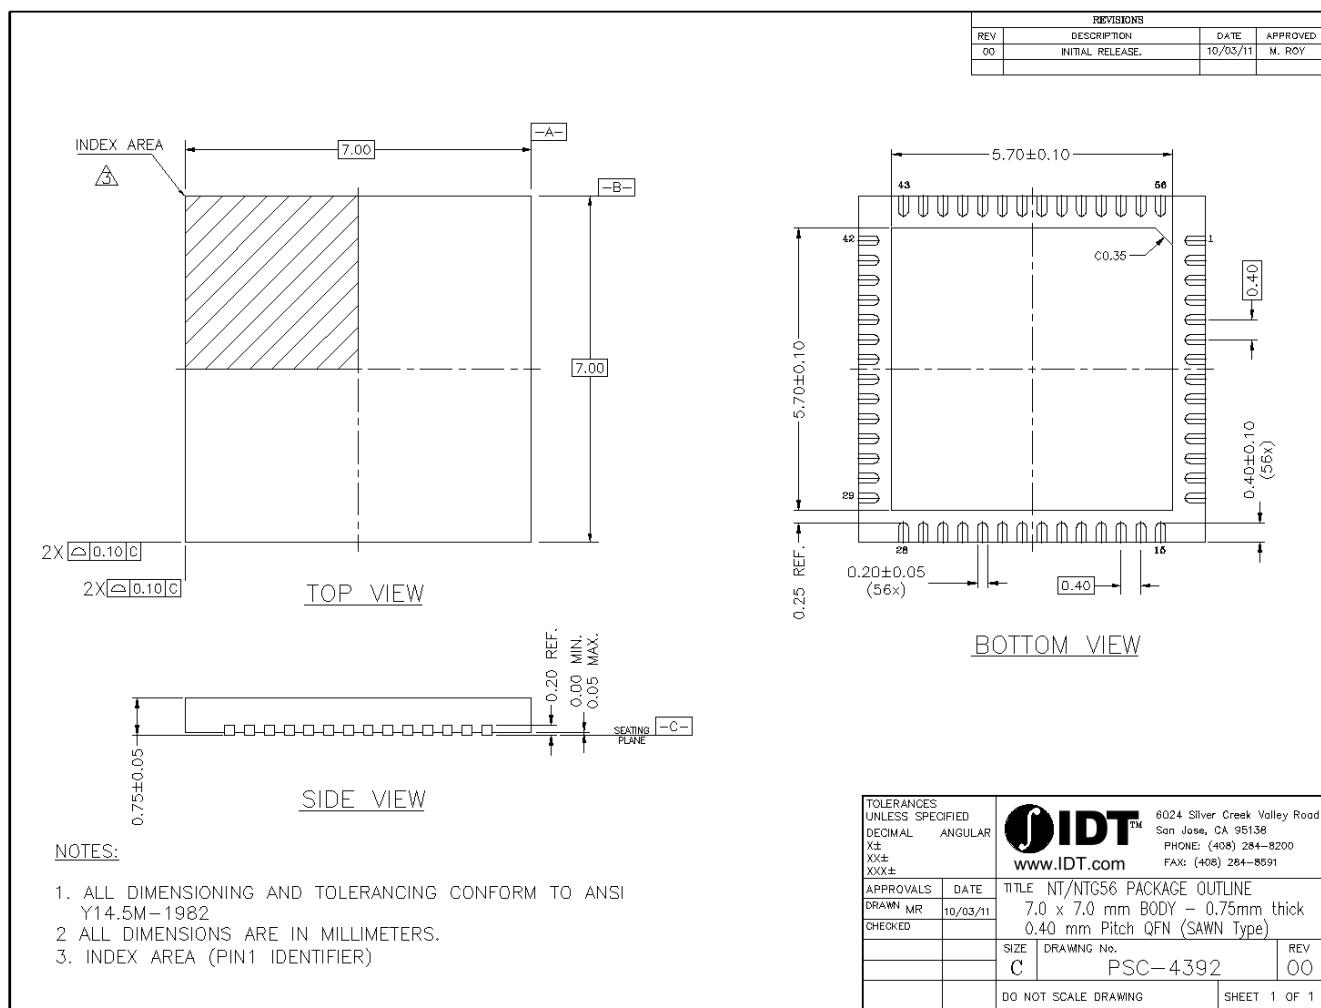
Package Outline Drawing (QFN NTG56 7x7x1mm 56-ld)
